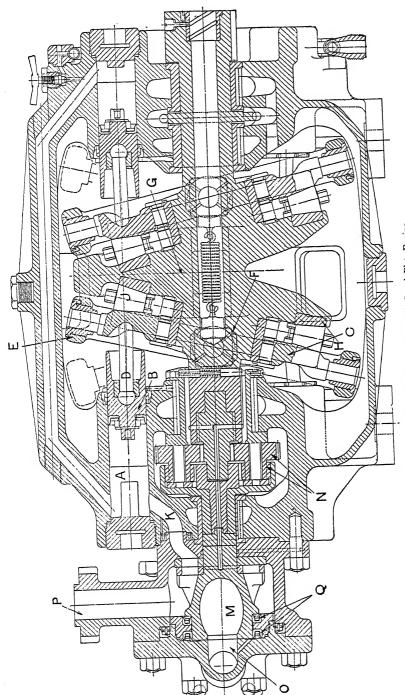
Sectional Drawing of a Hydraulic Swash Plate Enginc
